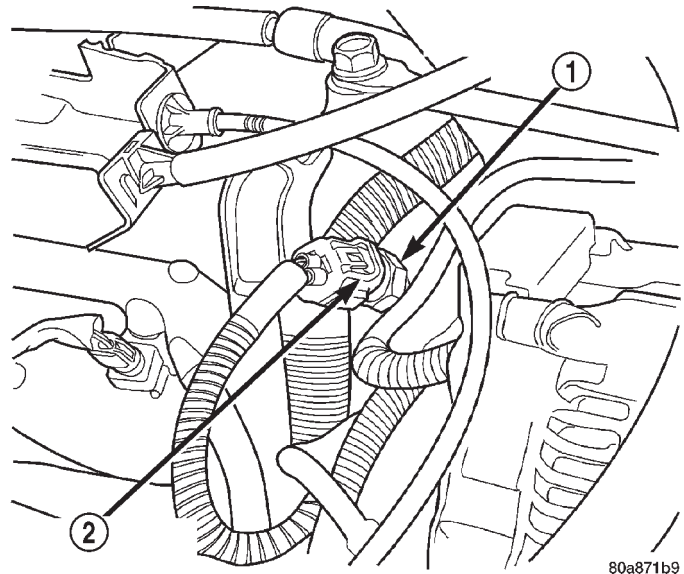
Intake Manifold Air Temperature Sensor—3.9/5.2/5.9L Engines—Typical
